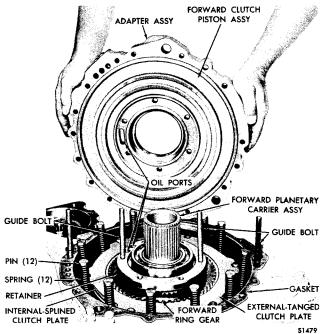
Installing rear housing adapter assembly (-3 overdrive model)
